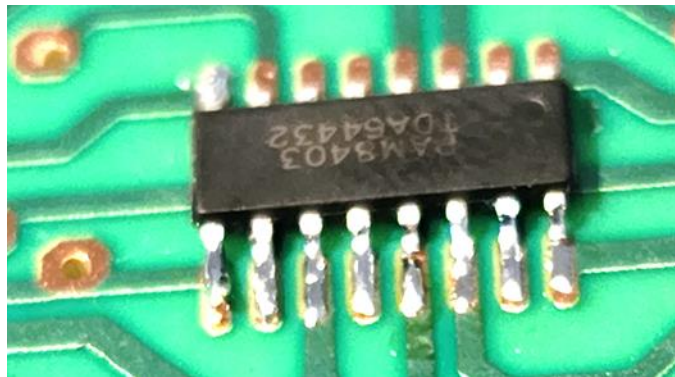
Carefully solder one side of the ICs legs to their PCB pads.
